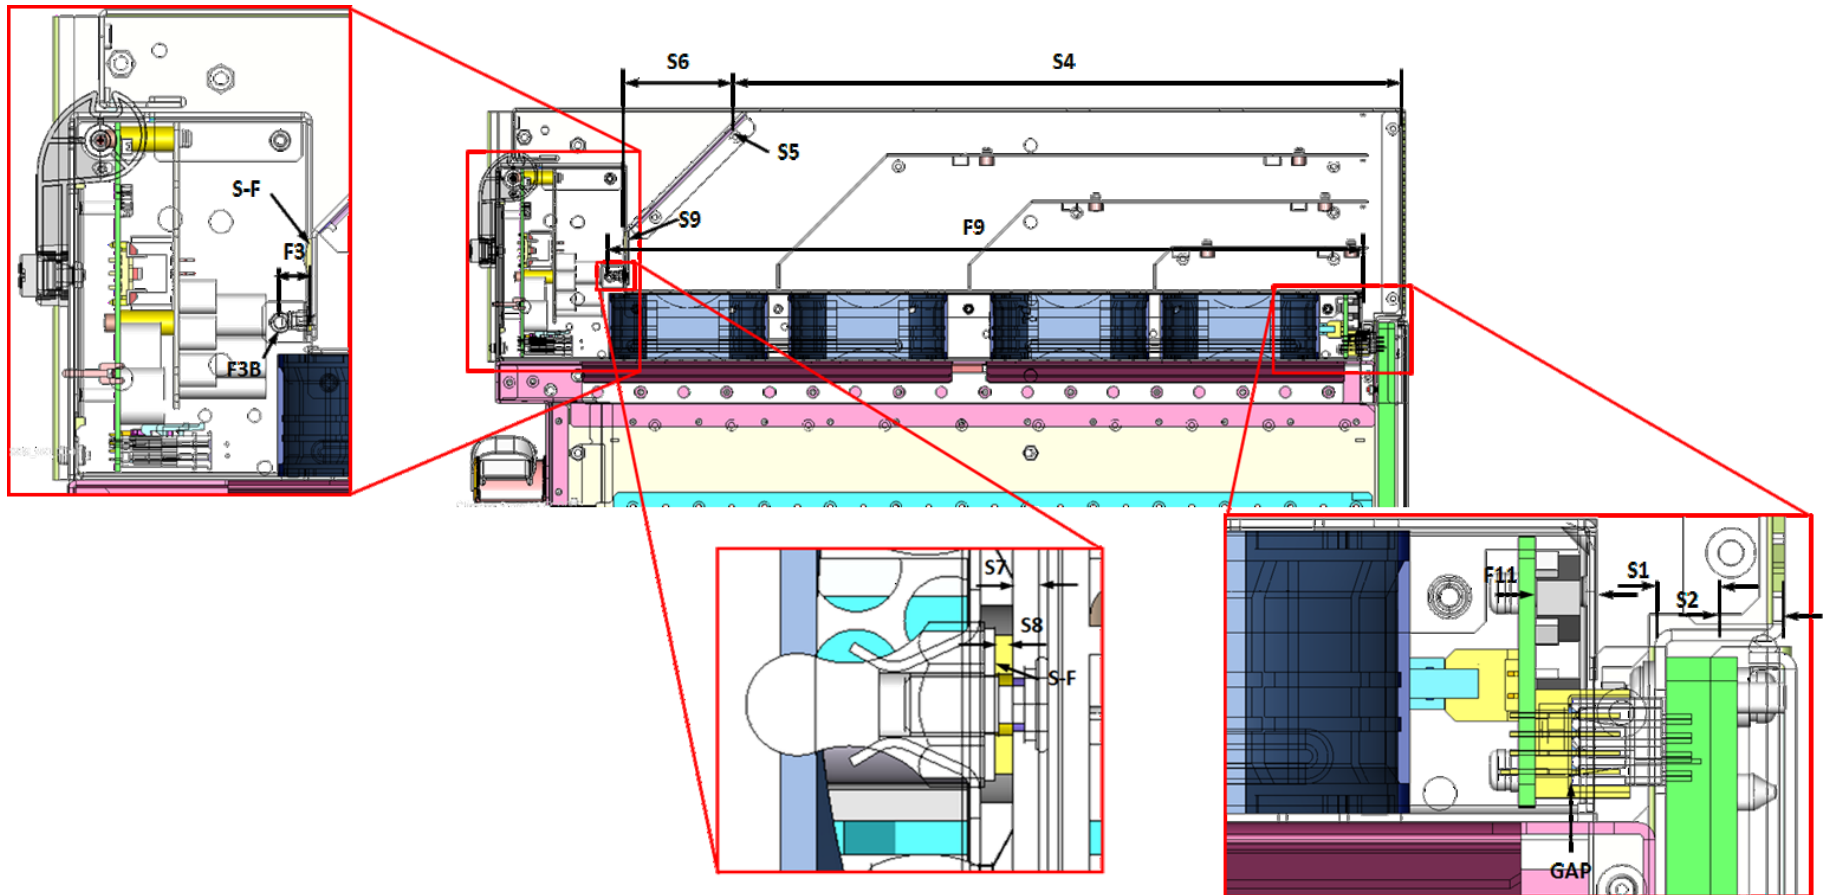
Tolerance Loop – GEN1 Fan Unit to Shelf - Washer Hard Stop
